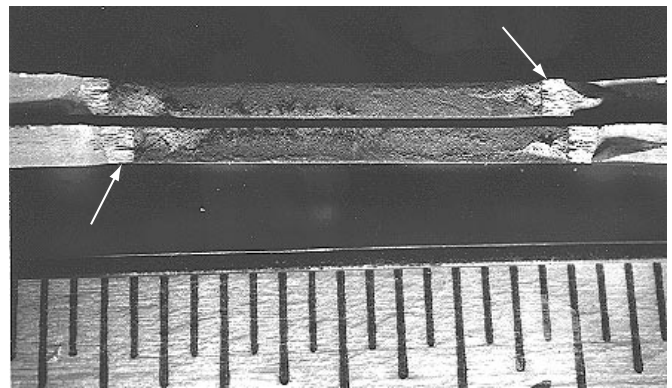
Fracture surfaces of the test specimens showing V-slant morphology. Arrows point to the fatigue precracked ends of the initial crack length $2a_0$.
